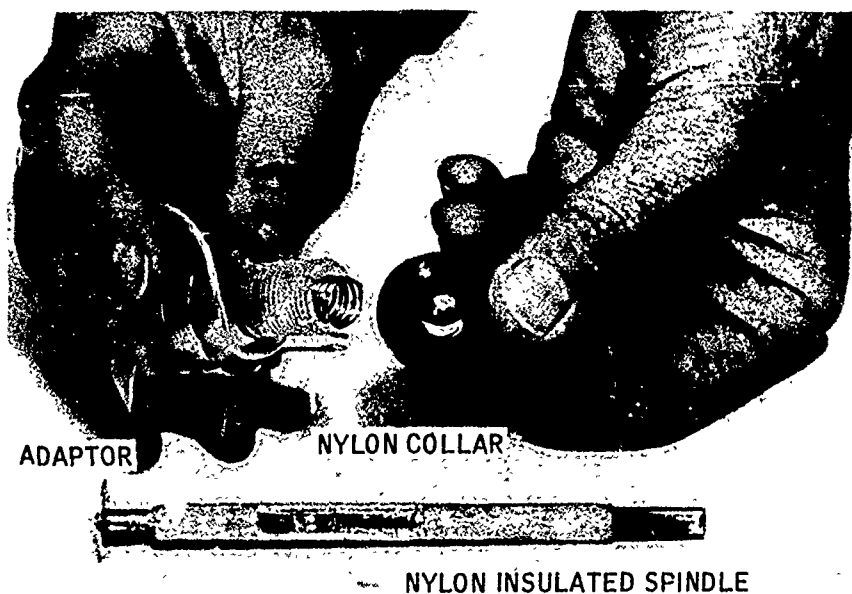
The Ball Adaptor and Nylon Covered Steel Spindle for Insulating the Ball and the Cylinder.
